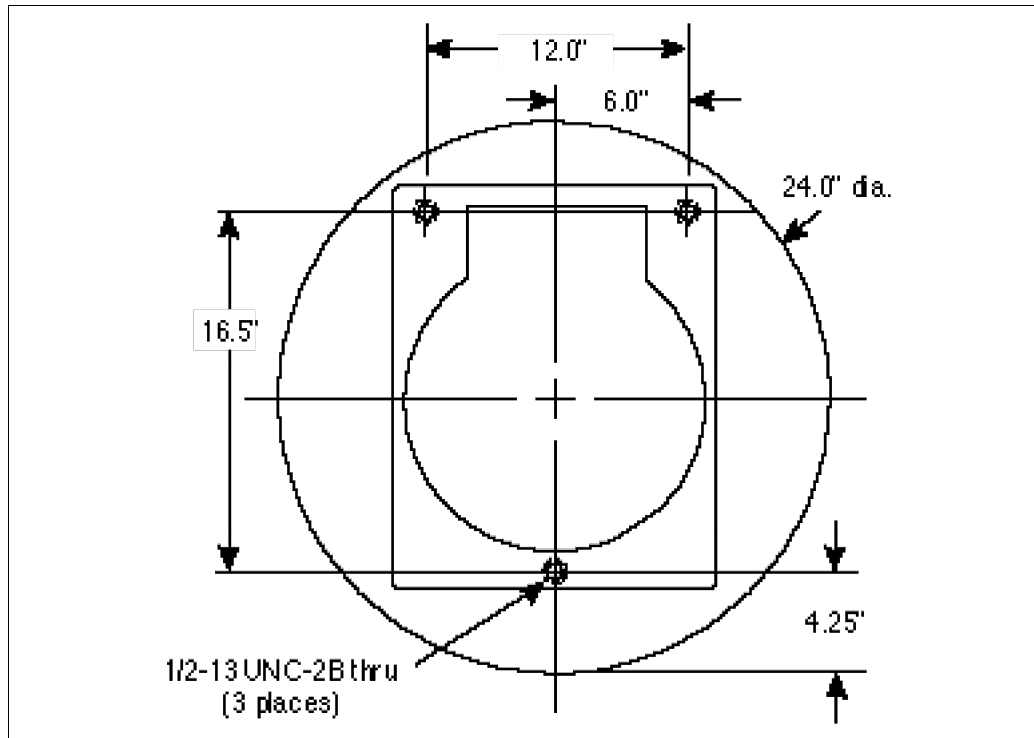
Mounting Hole Pattern (Robot-to-Plate/Spool)
